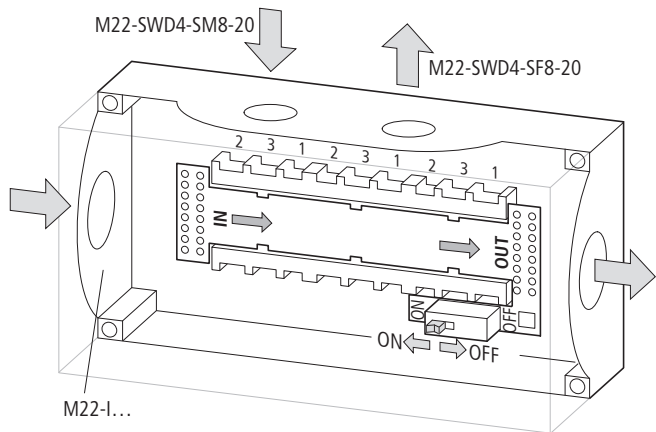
Surface mounting enclosure with PCB M22-SWD-ILP...
